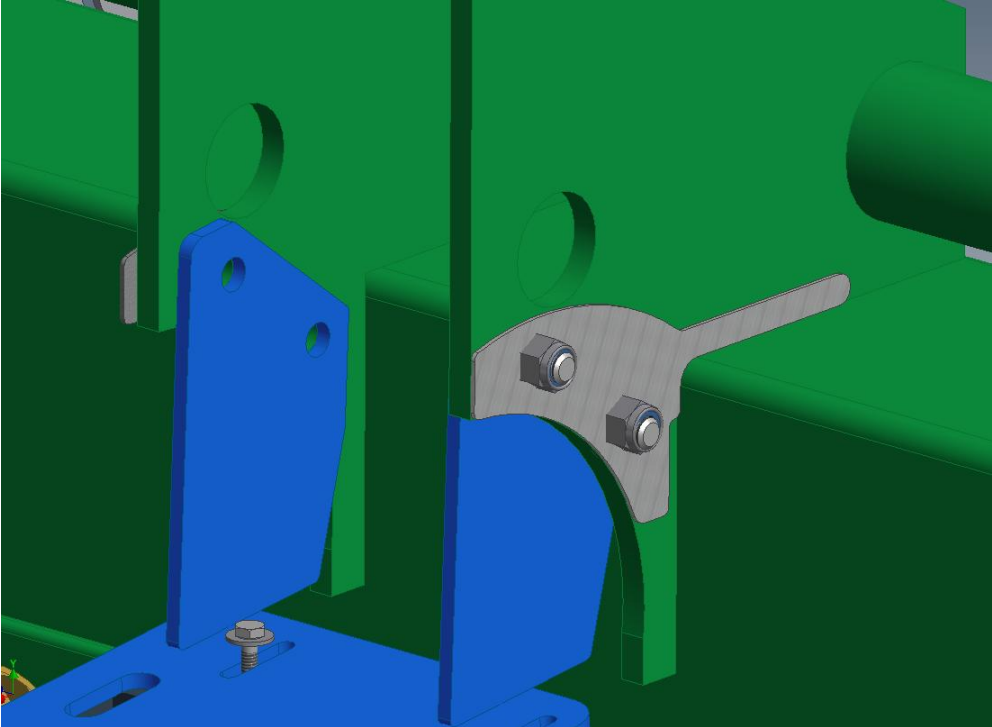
RIGHT SIDE OF JD 640D REEL CYLINDER MOUNT
